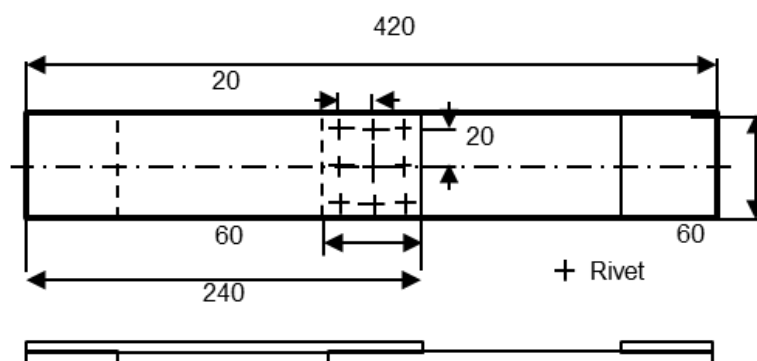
Geometry of the fatigue test specimen of a riveted joint
